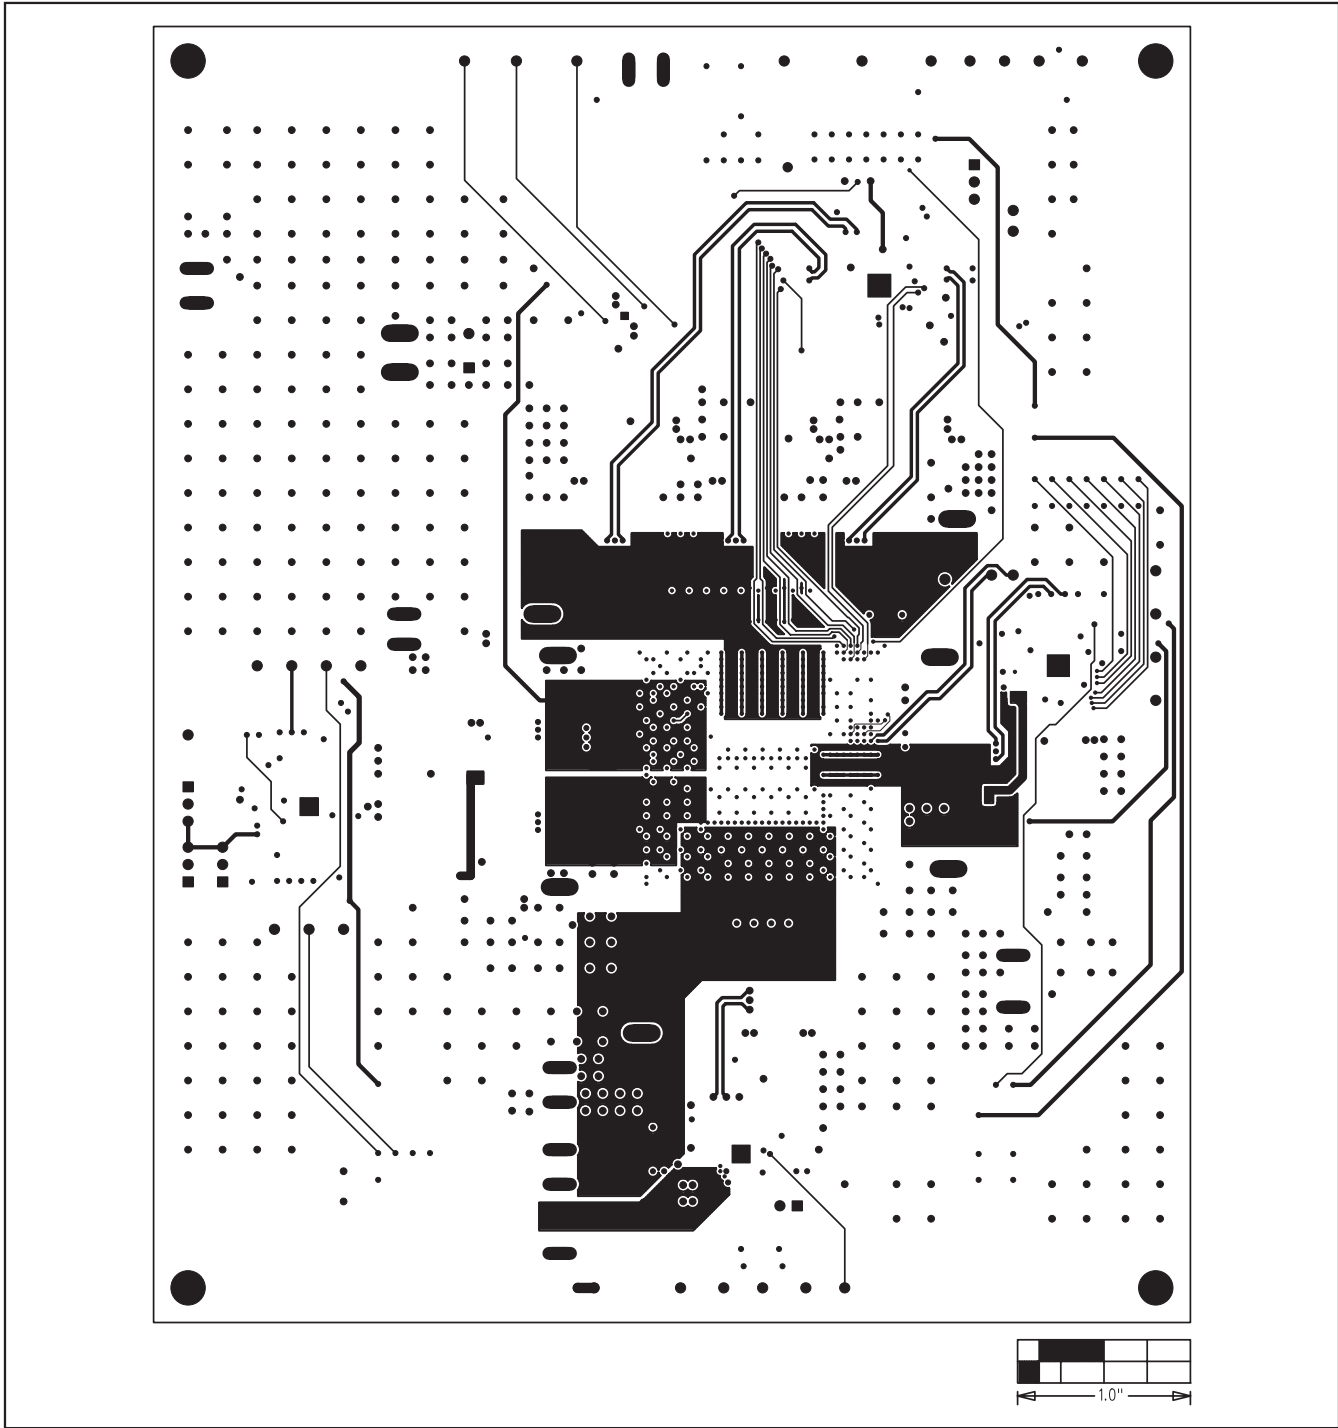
MAX17030 EV Kit PCB Layout —Internal Layer 6 (Signal Layer)
